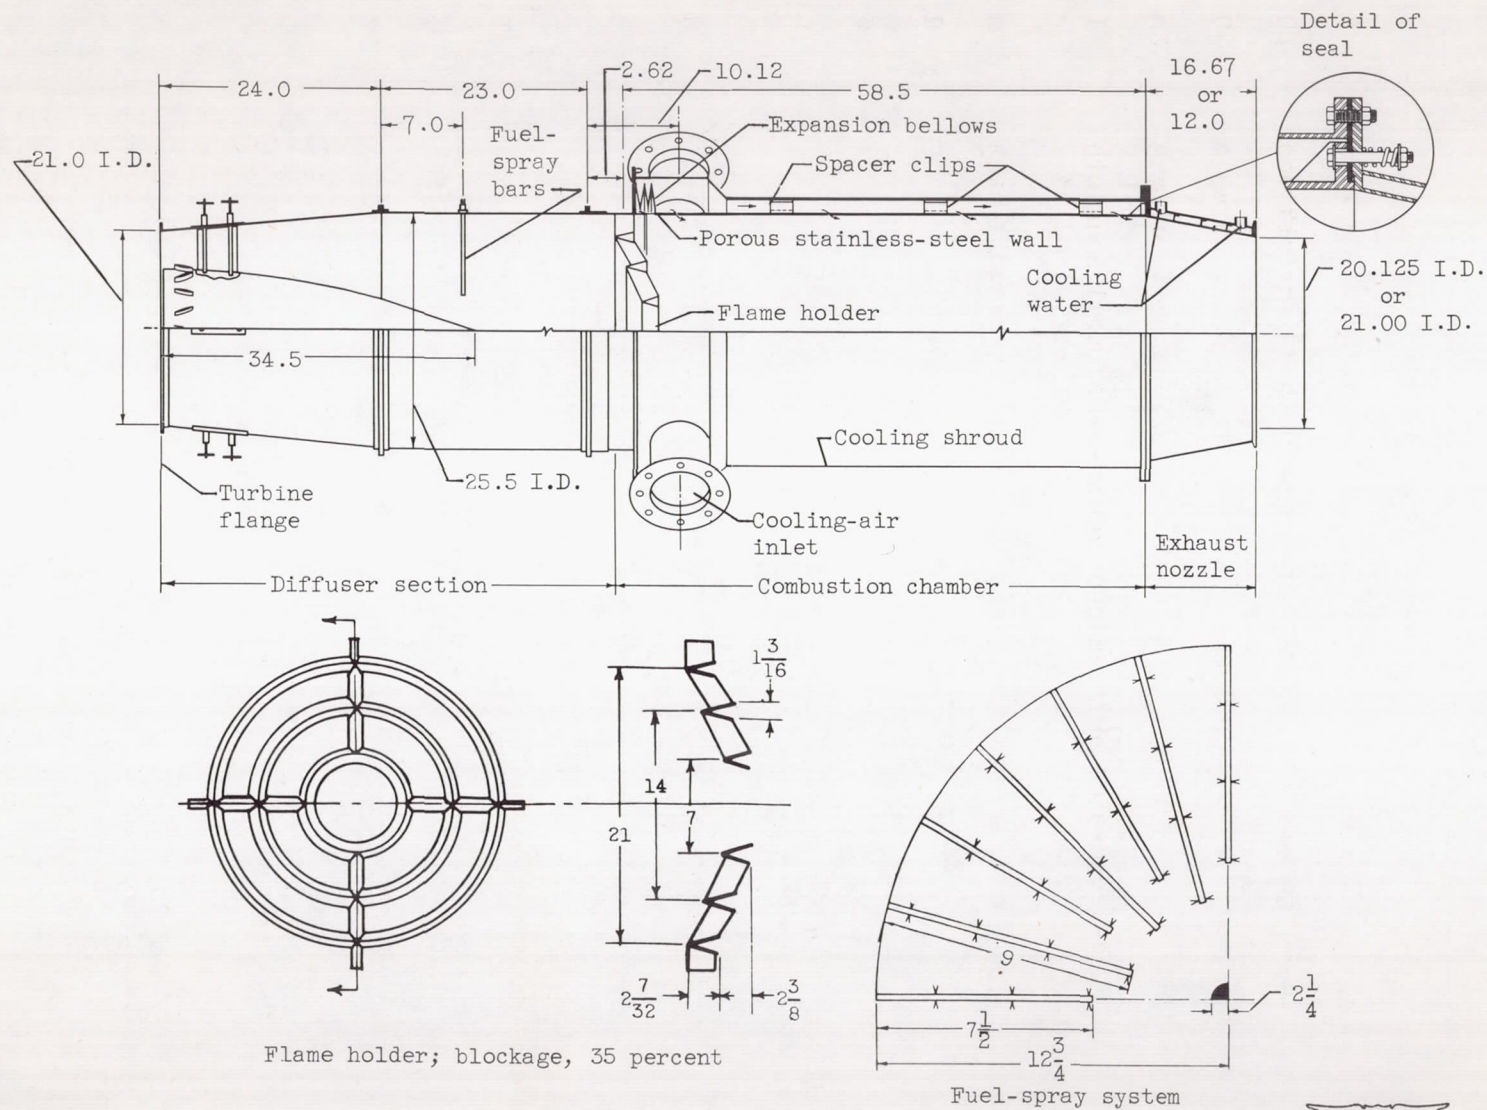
Sectional view of afterburner. (All dimensions in inches.)
